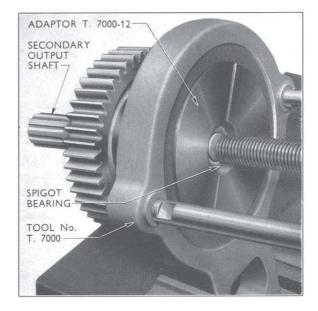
Removing Secondary Output Shaft Spigot Bearing
